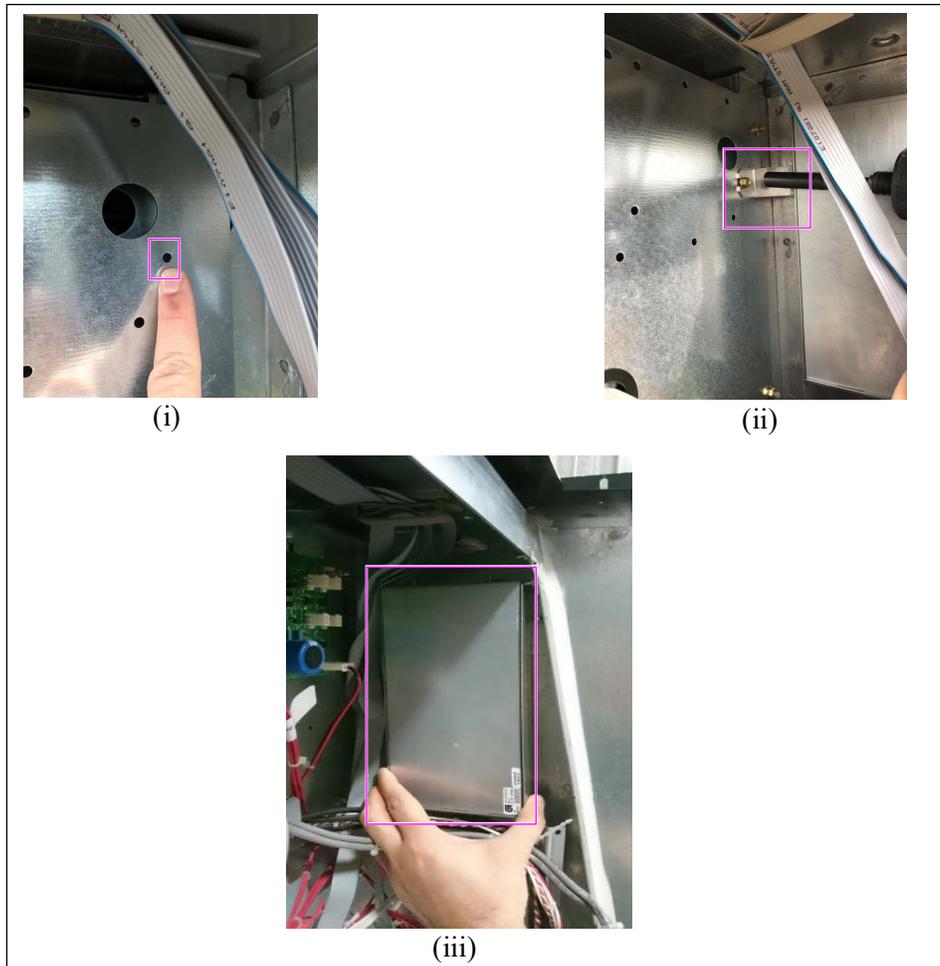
Mounting I.S. Barrier Box for Encore 700 Units
